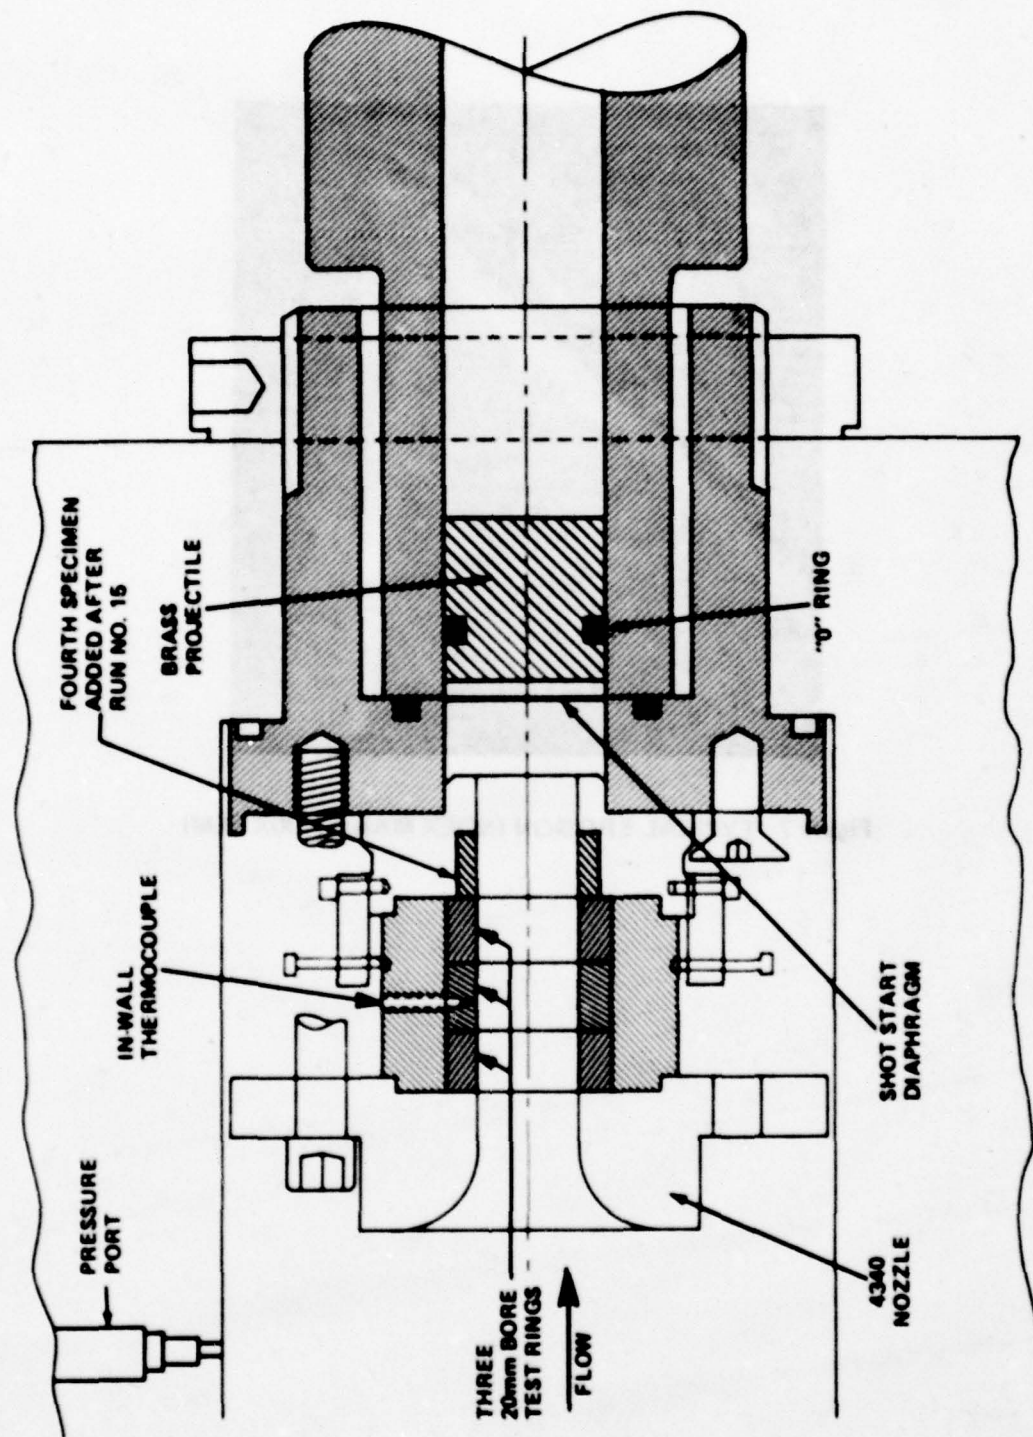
SHOCK TUBE GUN TEST SECTION MODIFIED TO ACCEPT THREE 20mm BORE EROSION TEST RINGS
